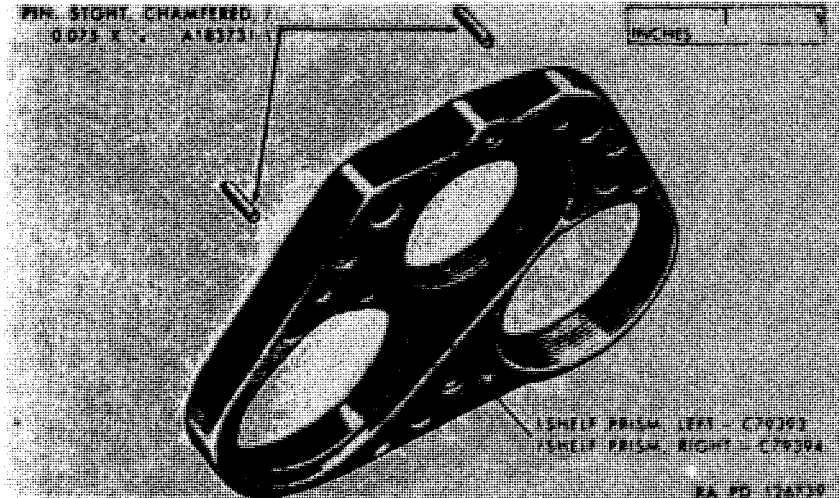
Stripped prism shelf assembly (left or right) - exploded view.
